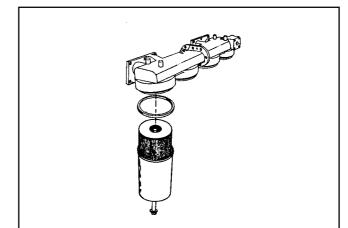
Changing L.O. element on KV-12/KV-16 engines.
